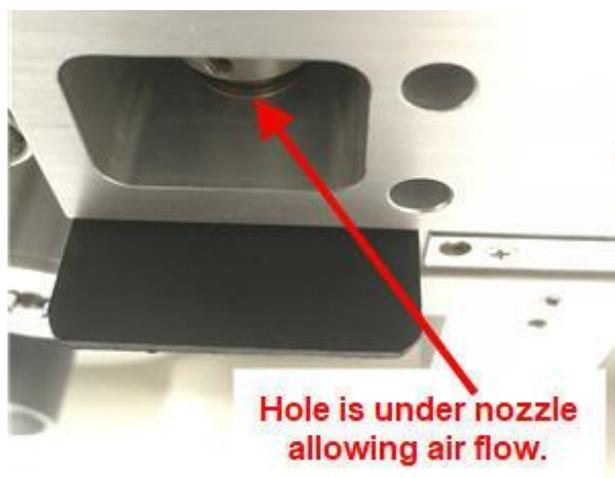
Nozzle Seal Tool with Hole Under the Nozzle
